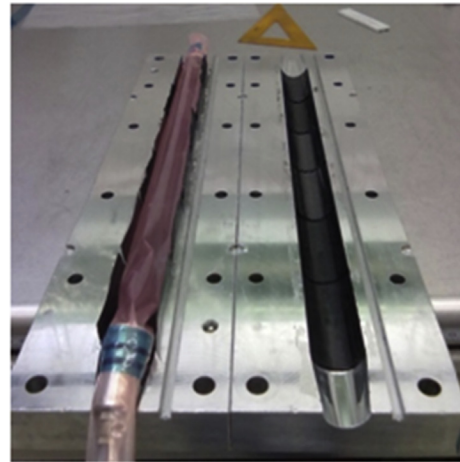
Hand lay-up on the mold, the vacuum bag and the pneumatic connectors.
